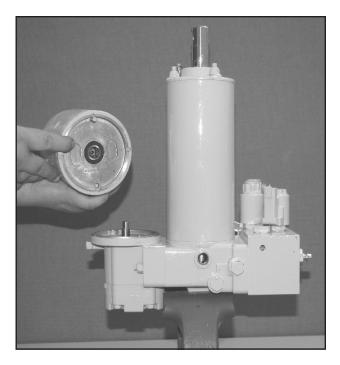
Hold the motor parts together while removing it from the pump.
